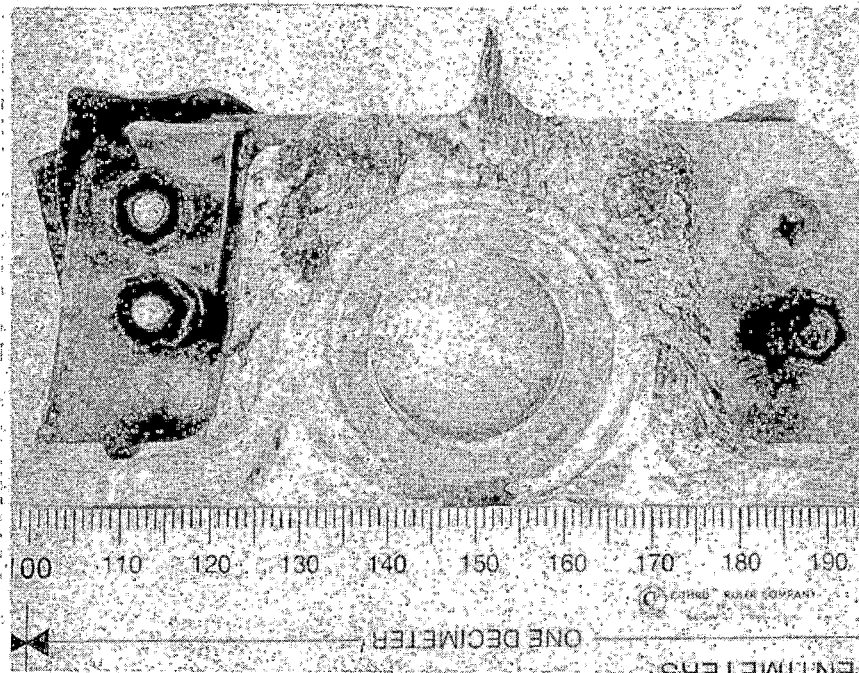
THE FAILED FITTING REMNANT SHOWN IN PHOTO 3, REMOVED AND CLEANED FOR SUBSEQUENT LABORATORY EXAMINATION.
